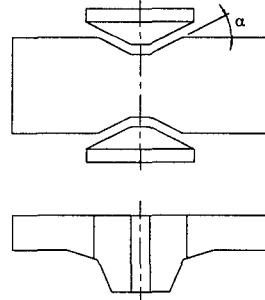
Angle of V shaped die for manufacturing crank throw preform
